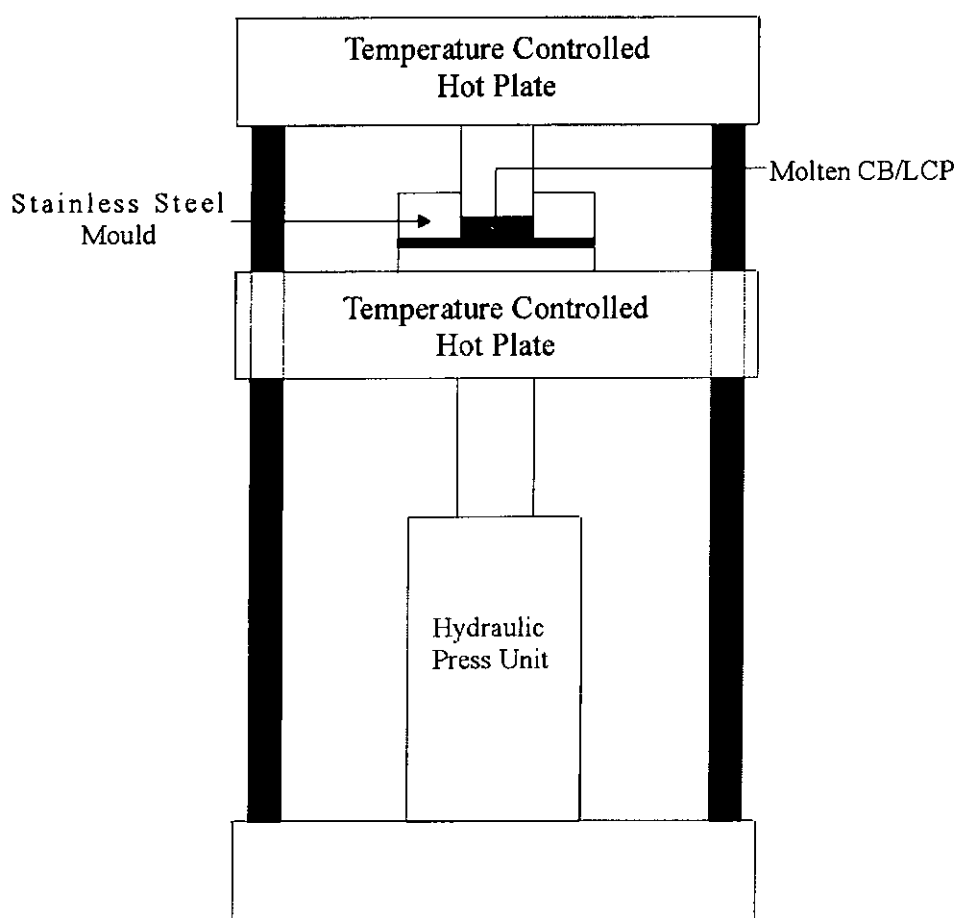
Schematic diagram of the hot press machine and stainless steel mould
